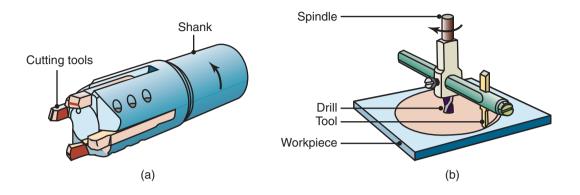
(a) Trepanning tool. (b) Trepanning with a drill-mounted single cutter.
